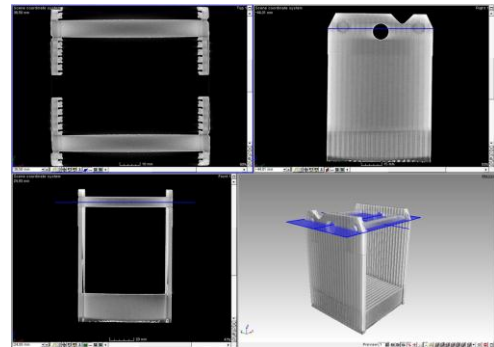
Sample images of side plate to fixing bar made by CT: (a) front, (b) side, (c) top view and (d) 3D image.
